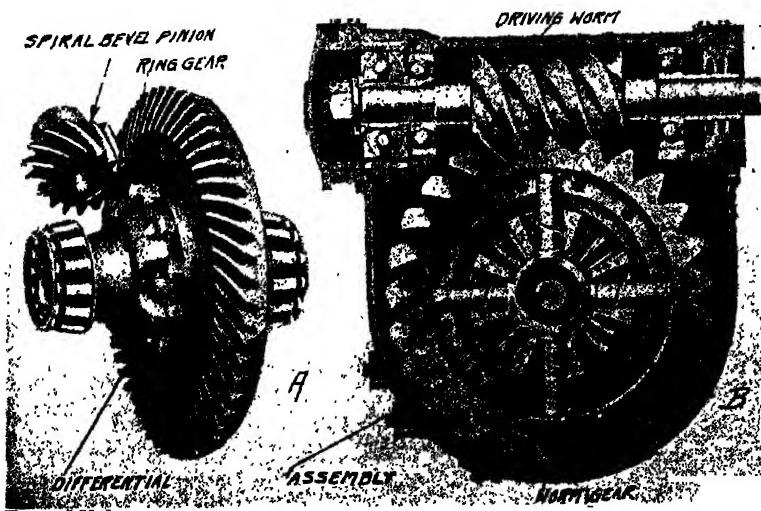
Outlining Construction of Spiral Bevel Drive Gearing at A and Worm Drive Gearing at B.
